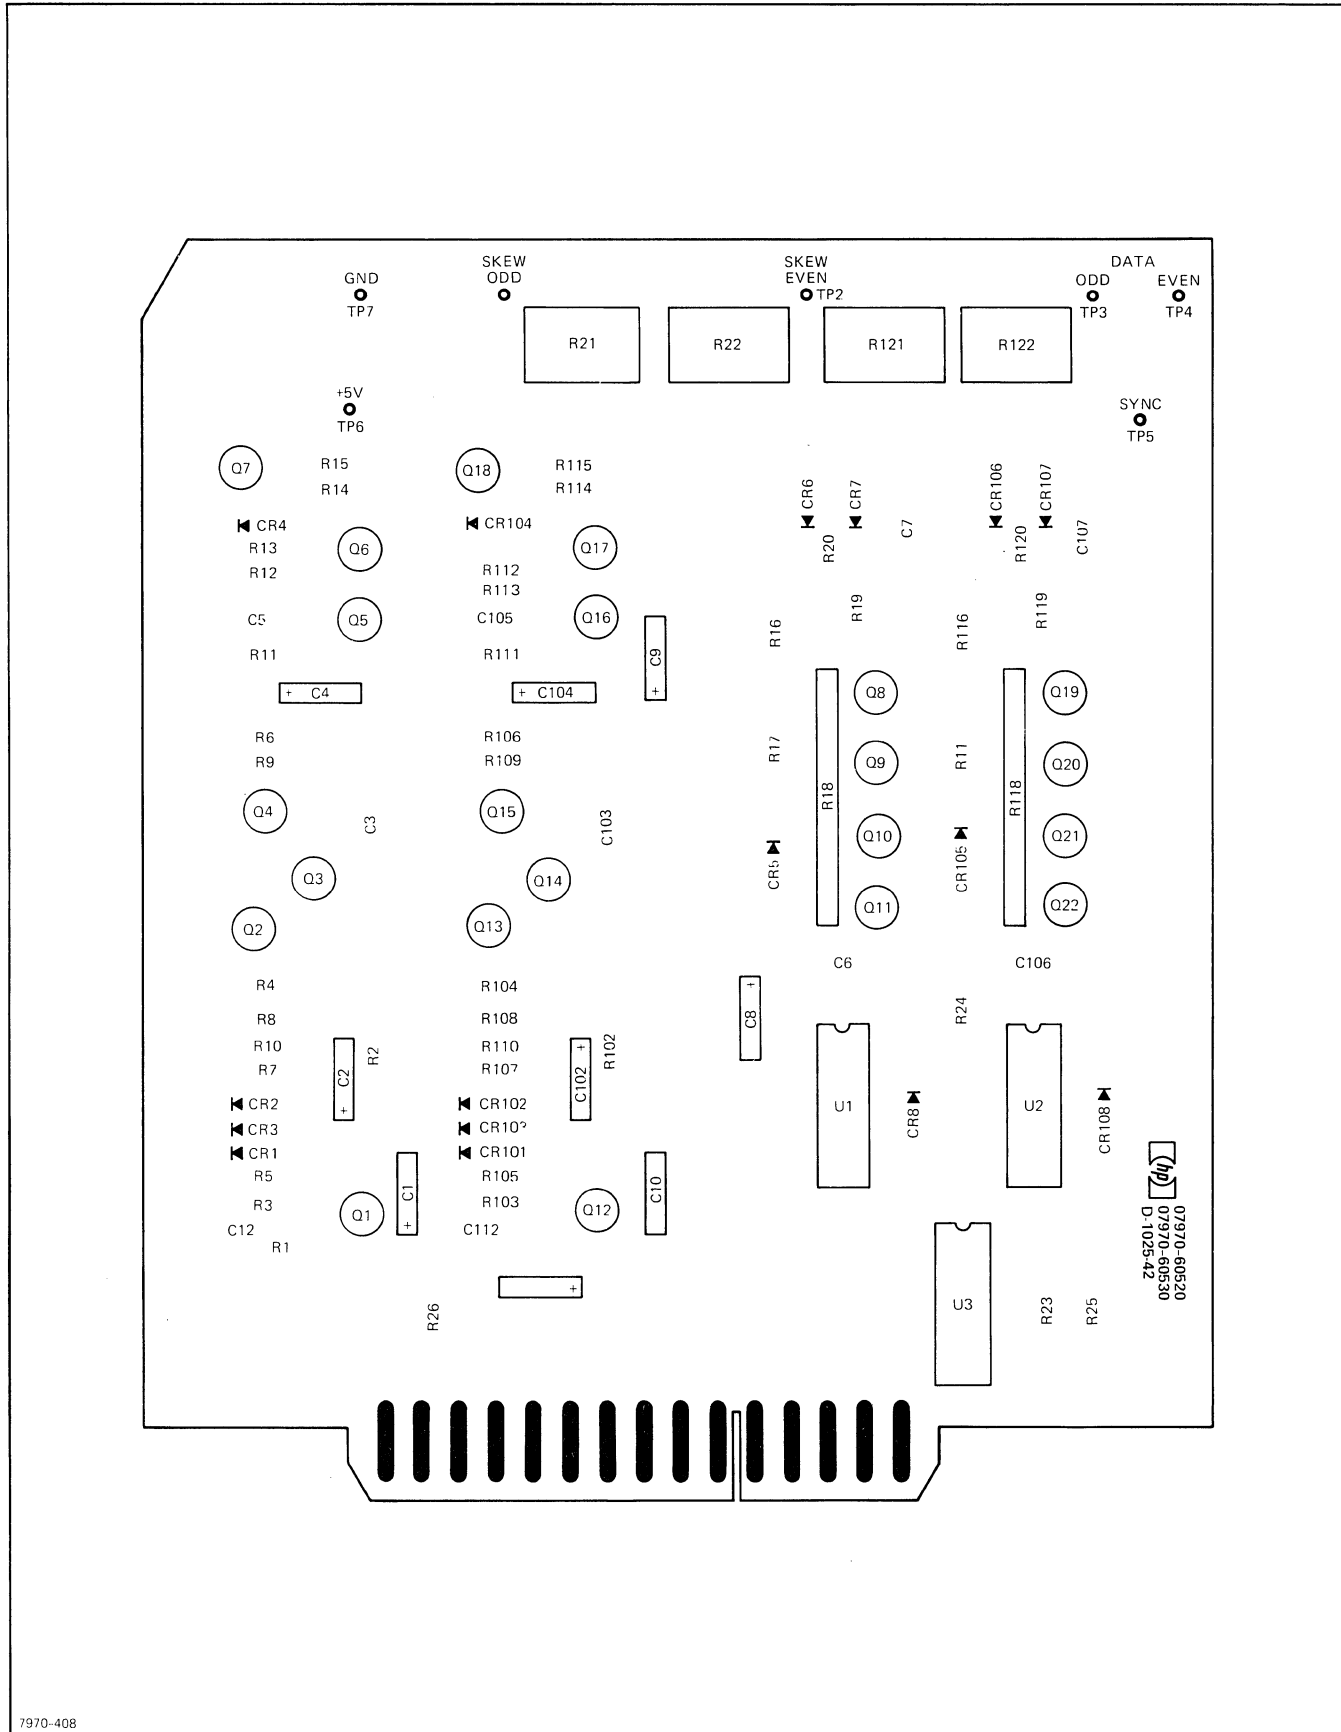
Dual-Channel Read Data PC Assembly A18A3 thru A18A6, Parts Location Diagram
